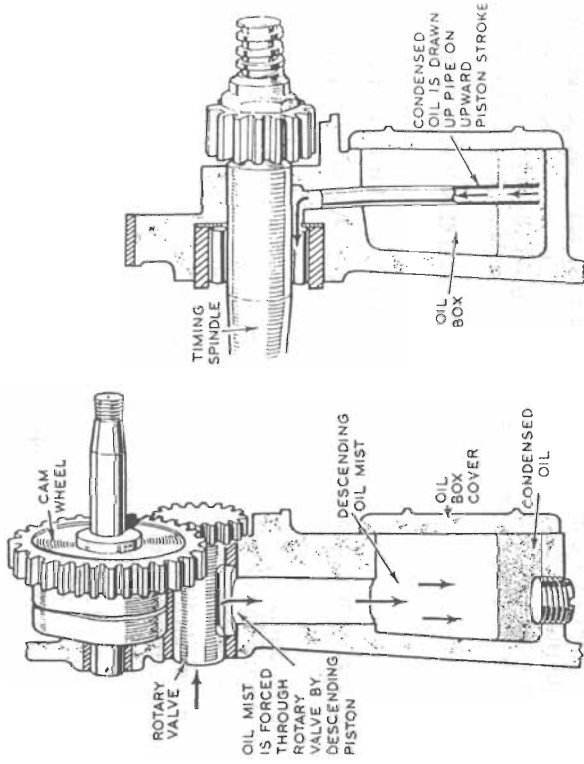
CUT-AWAY VIEW SHOWING OPERATION OF THE ROTARY VALVE.
